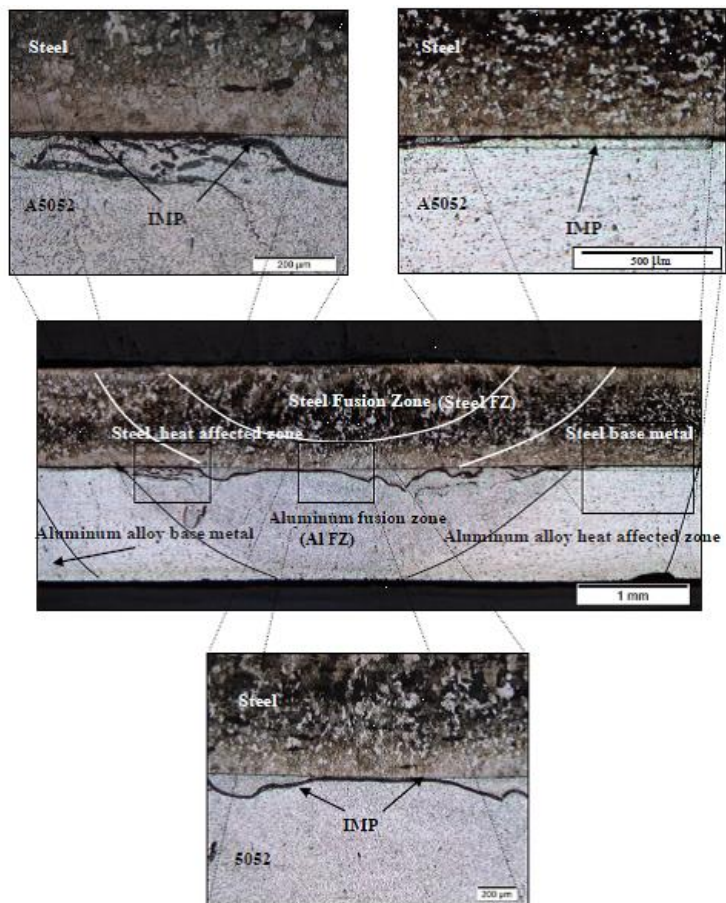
Example of cross-sectional observation of the weld between *zinc-coated steel* and A5052 aluminum alloy.
